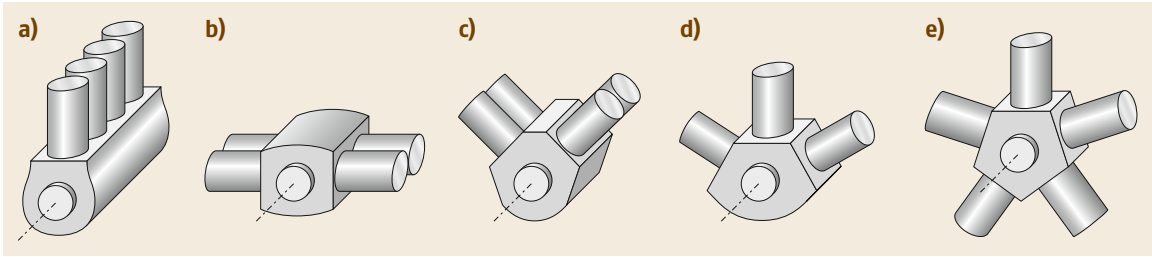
e Cylinder configurations (after [17.1]). (a) In-line machine, (b) opposed-cylinder machine, (c) V machine, (d) W-machine, and (e) radial machine
